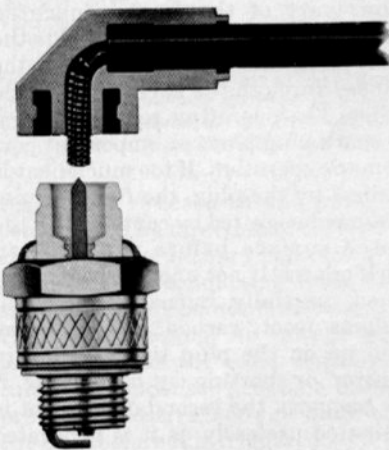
Cut-away view of special "shorty" type spark plug and terminal available for chain saw engines. Refer to Fig. CS35 for a second type special plug.
